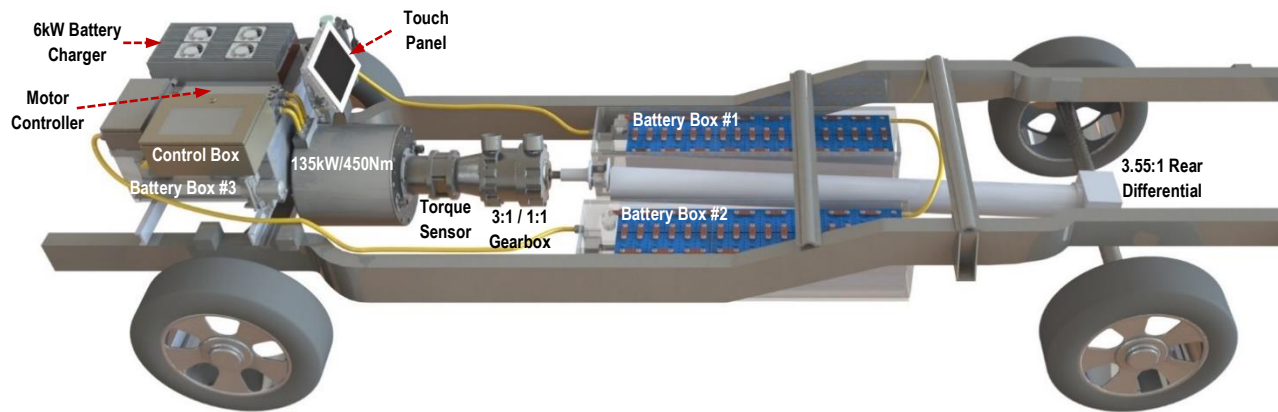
CAD drawing of truck drivetrain showing battery pack, motor controller, motor, gearbox & rear differential
